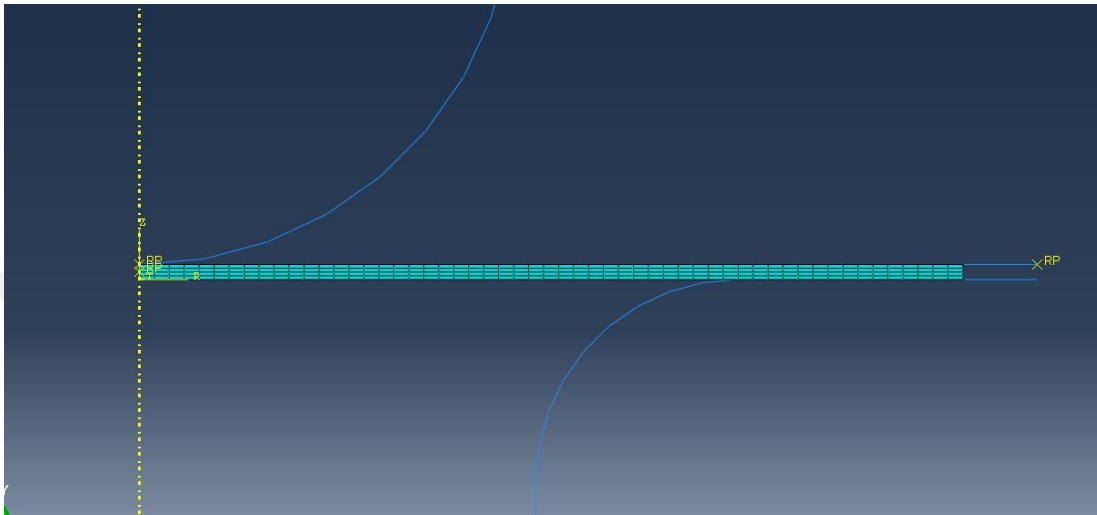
Round bottom cup drawing assembly and mesh of the blank
